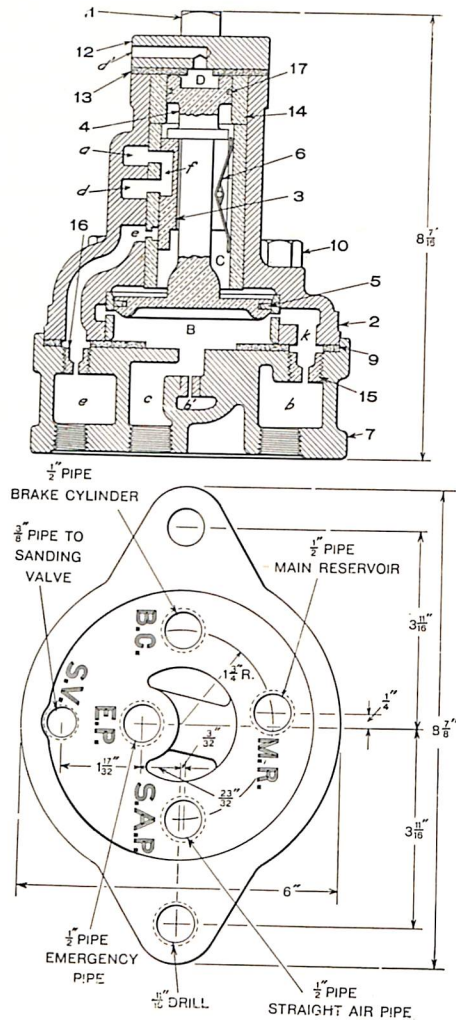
Section and End View of the Type H-2 Emergency Valve
